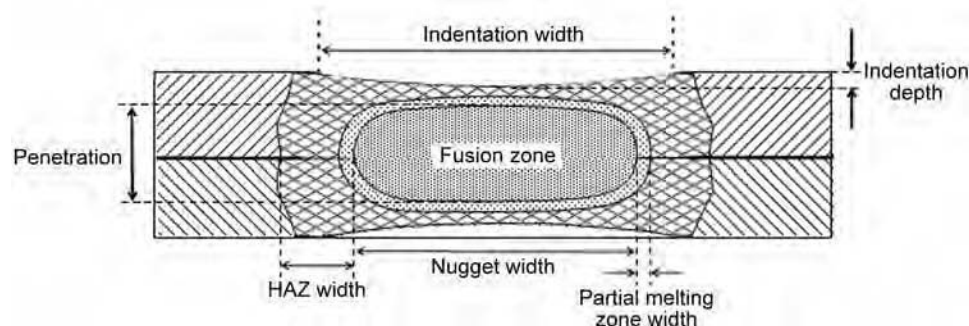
Schematic of a spot weld. HAZ, heat-affected zone
